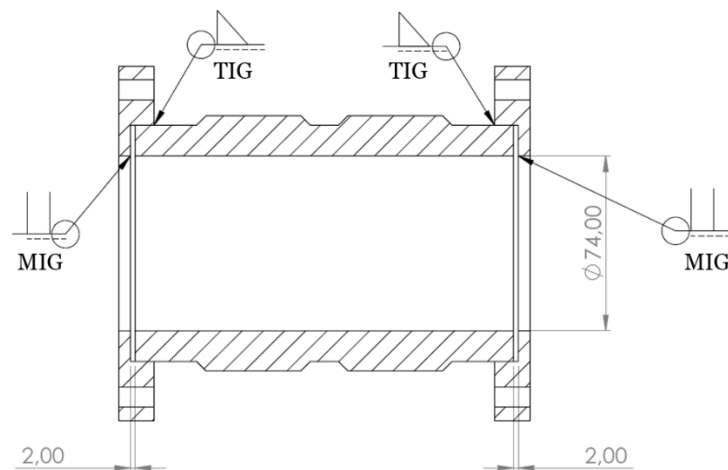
Socket Flange Welding in a section view of the Post-Chamber drawing. Dimensions in millimeters.
